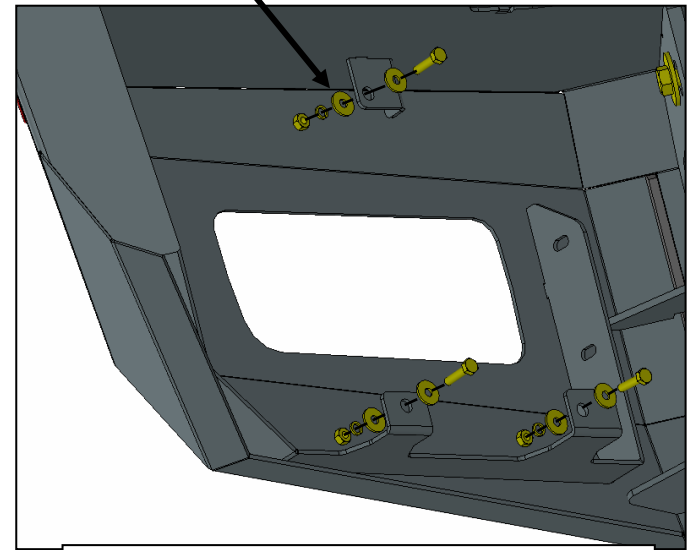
Driver/left Frame Bracket and Support Bracket installed. Models with ACC sensor, do not install driver/left side tow
